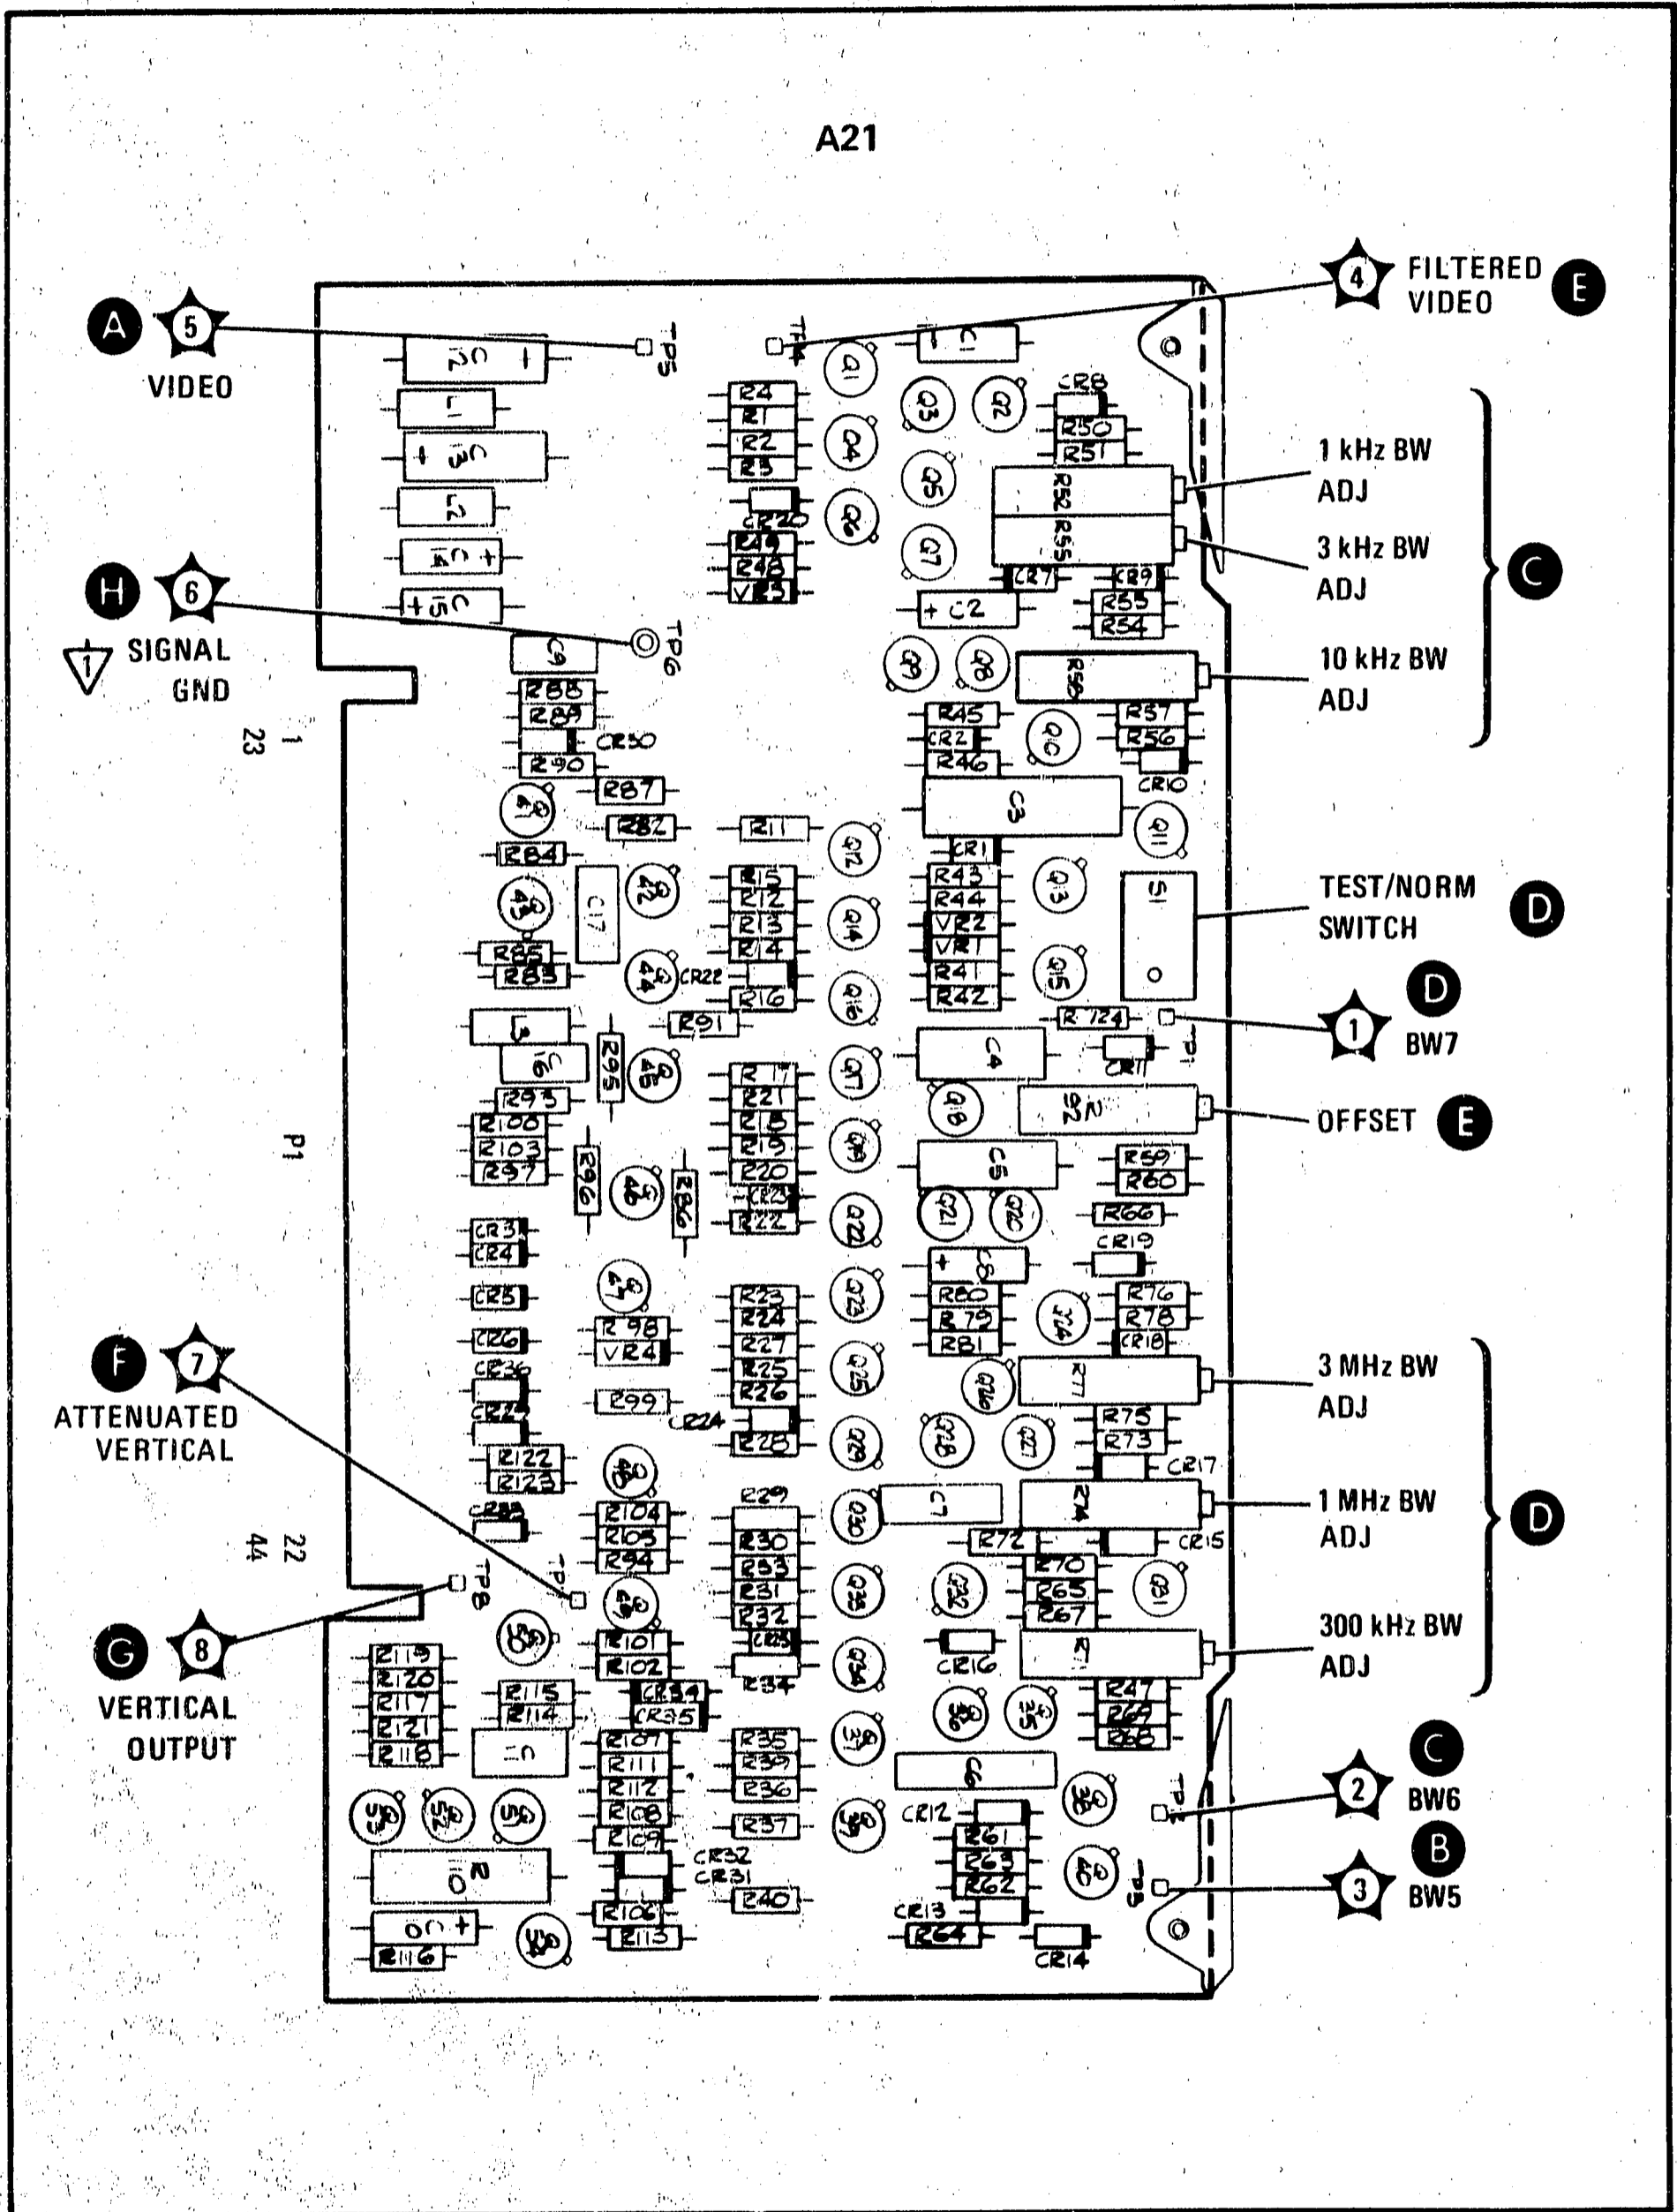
A21 Video Assembly, (Option 002), Component Locations
